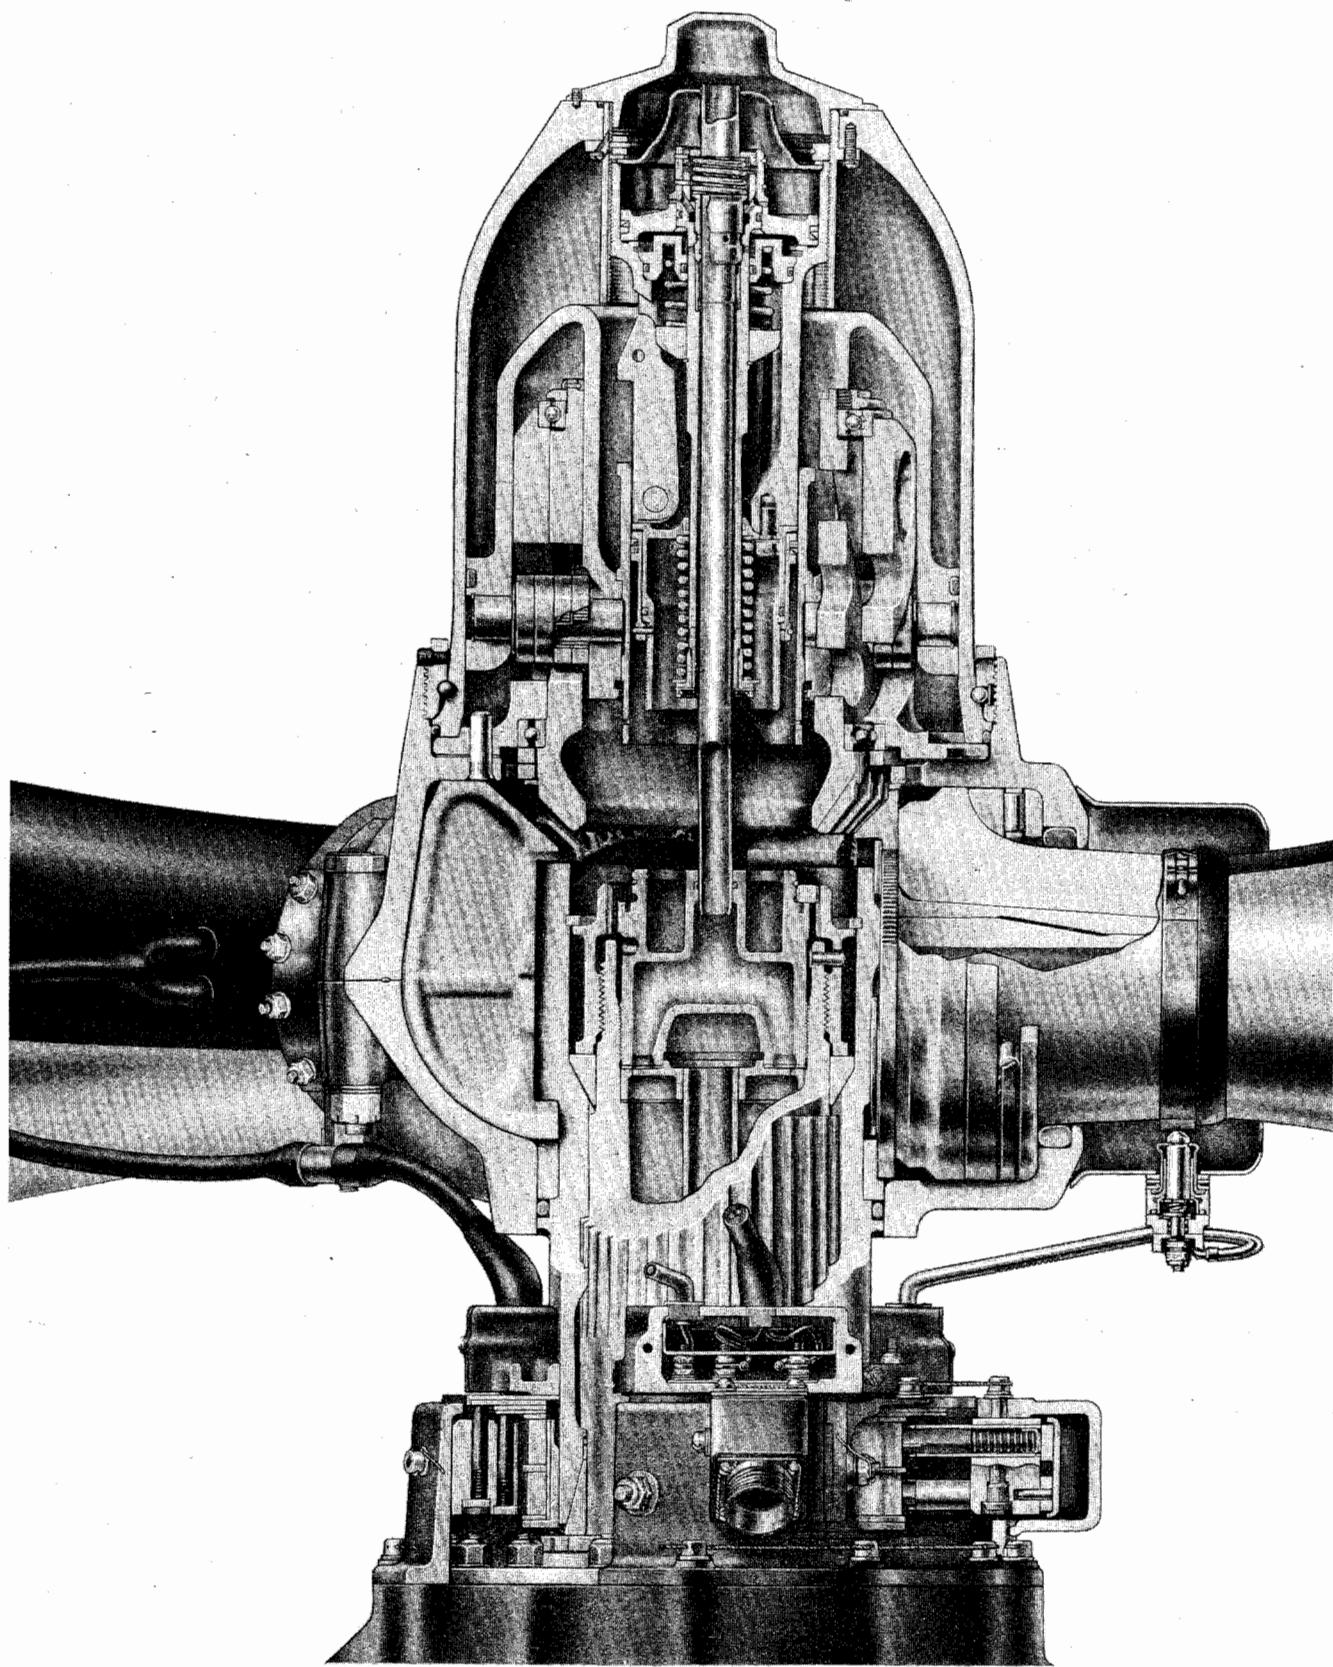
Cutaway View 43E60 Engine Oil Propeller
